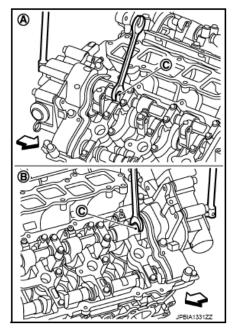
Fixing Flat Areas Of Control Shaft Using Wrench Courtesy of NISSAN MOTOR CO., U.S.A.
